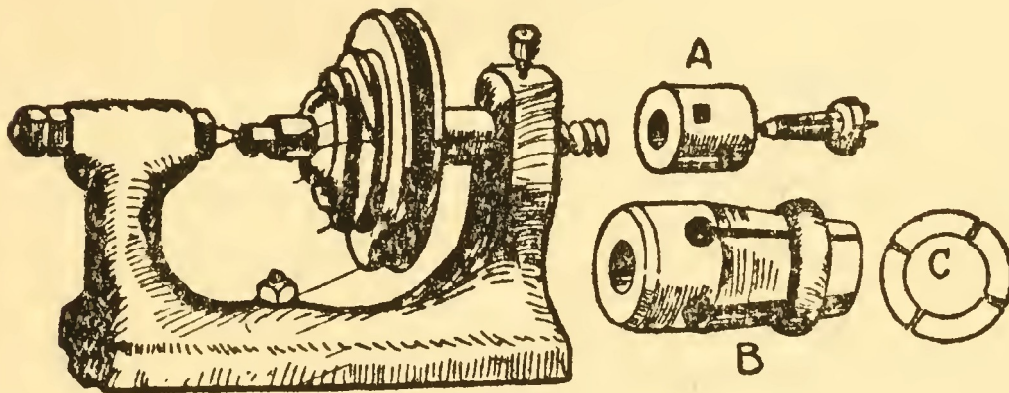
HEADSTOCK OF LATHE: A, METAL CHUCK; B, WOODEN SPLIT CHUCK; C, END VIEW OF B.
